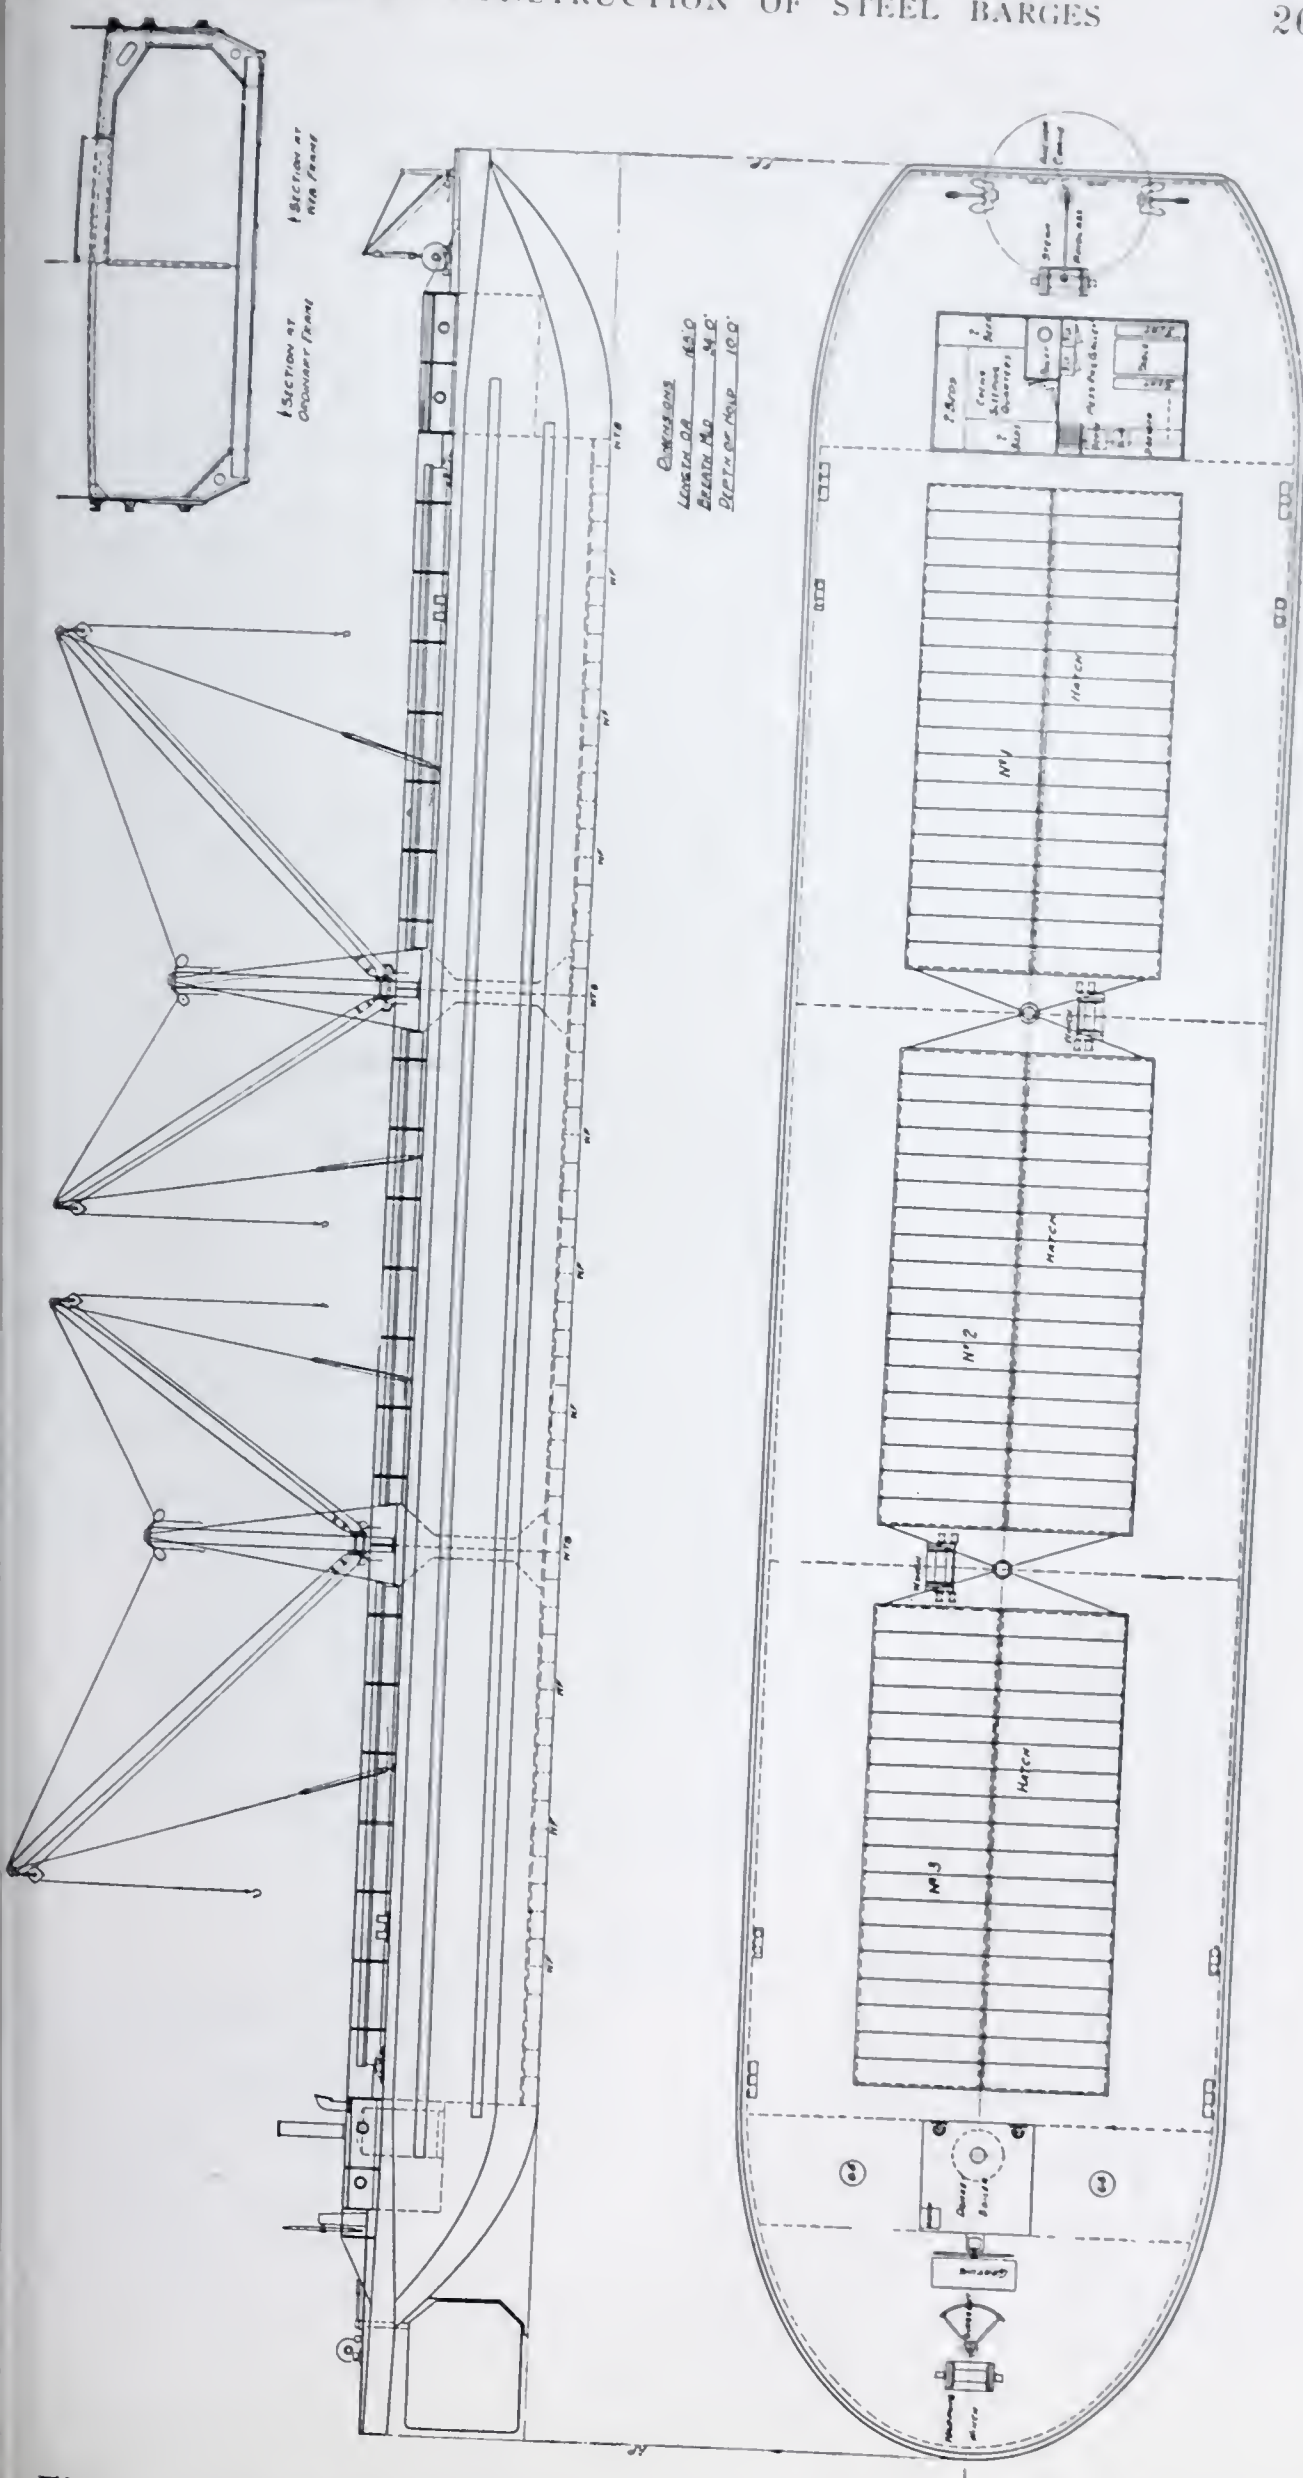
General Arrangement of 165-Foot Steel River Barge
